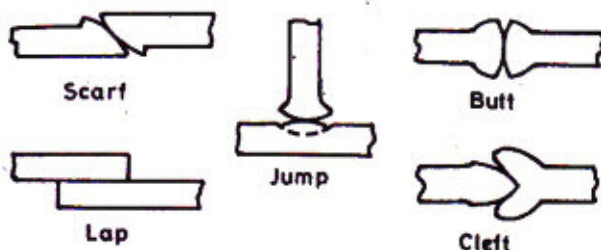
Types of joints used in forge or smith welding.
